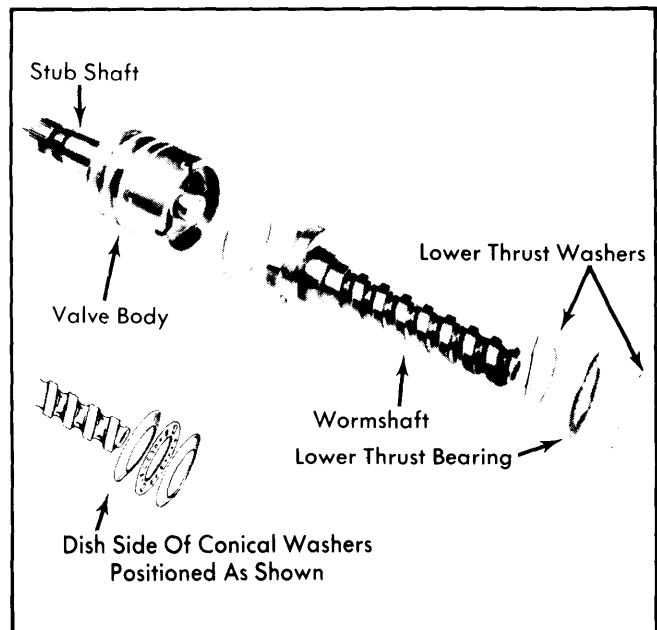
Reassembly of Valve Body and Wormshaft Assembly
